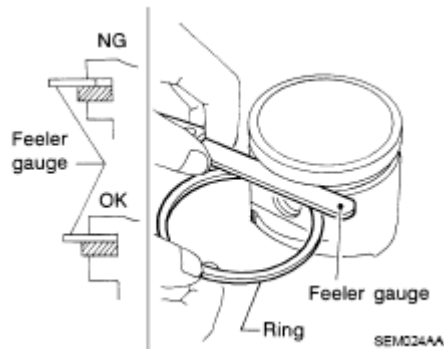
Measuring Side Clearance Of Piston Ring And Piston Ring Groove
